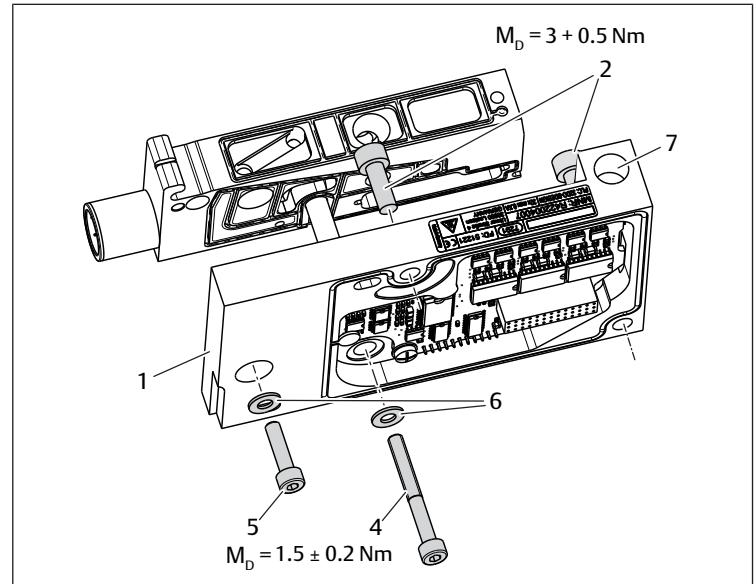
Mount AV05-B-design adapter module to AV03-AV05 transition plate
